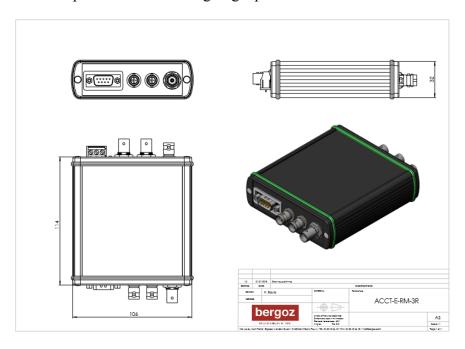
Schematic showing the dimensions of the ACCT-E-RM-3R courtesy of Bergoz
